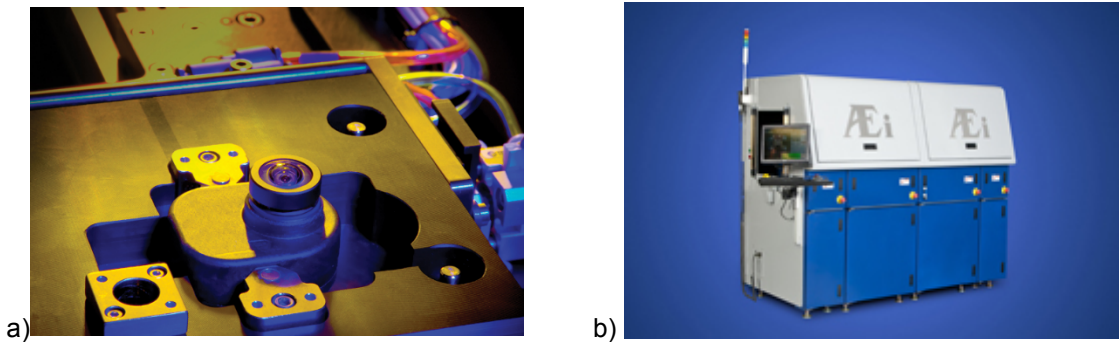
(a) Automotive camera in pallet fixture (b) CMAT assembly machine. Source: <http://www.aeiboston.com>
